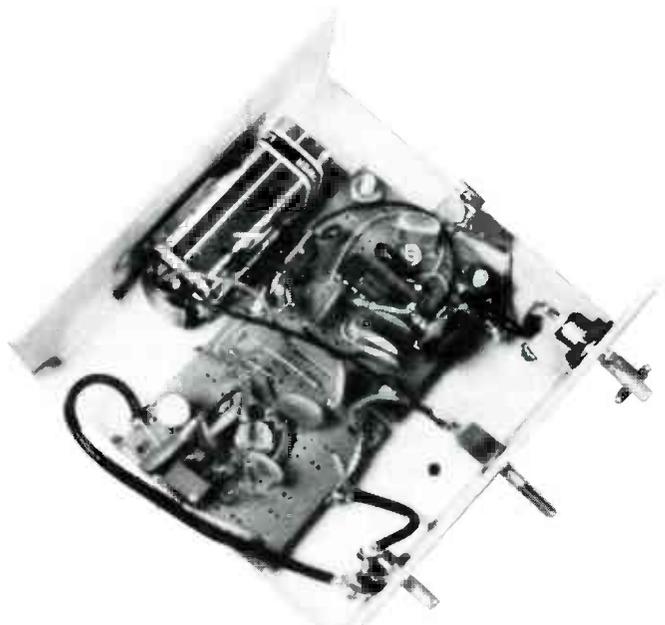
THE COMPONENTS CAN BE MOUNTED on perforated-wiring board. To help shield the components, a large braided grounding wire runs around the board.
